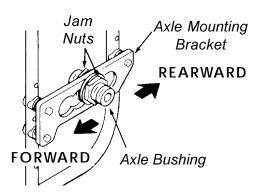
ADJUSTING WHEELBASE LENGTH
